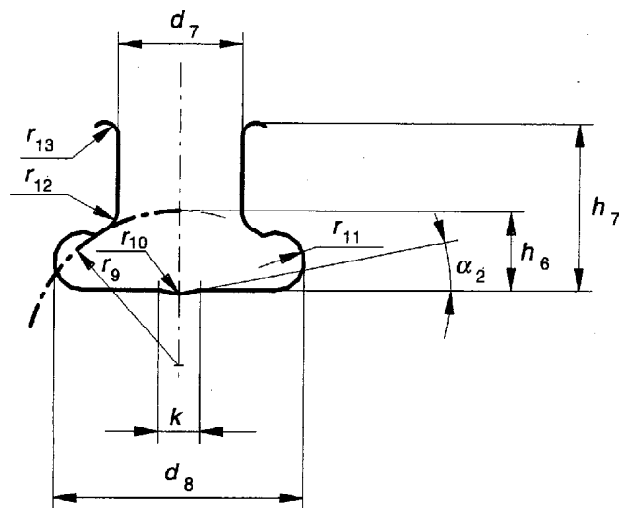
Dimensions of NOT GO gauges for ball couplings
